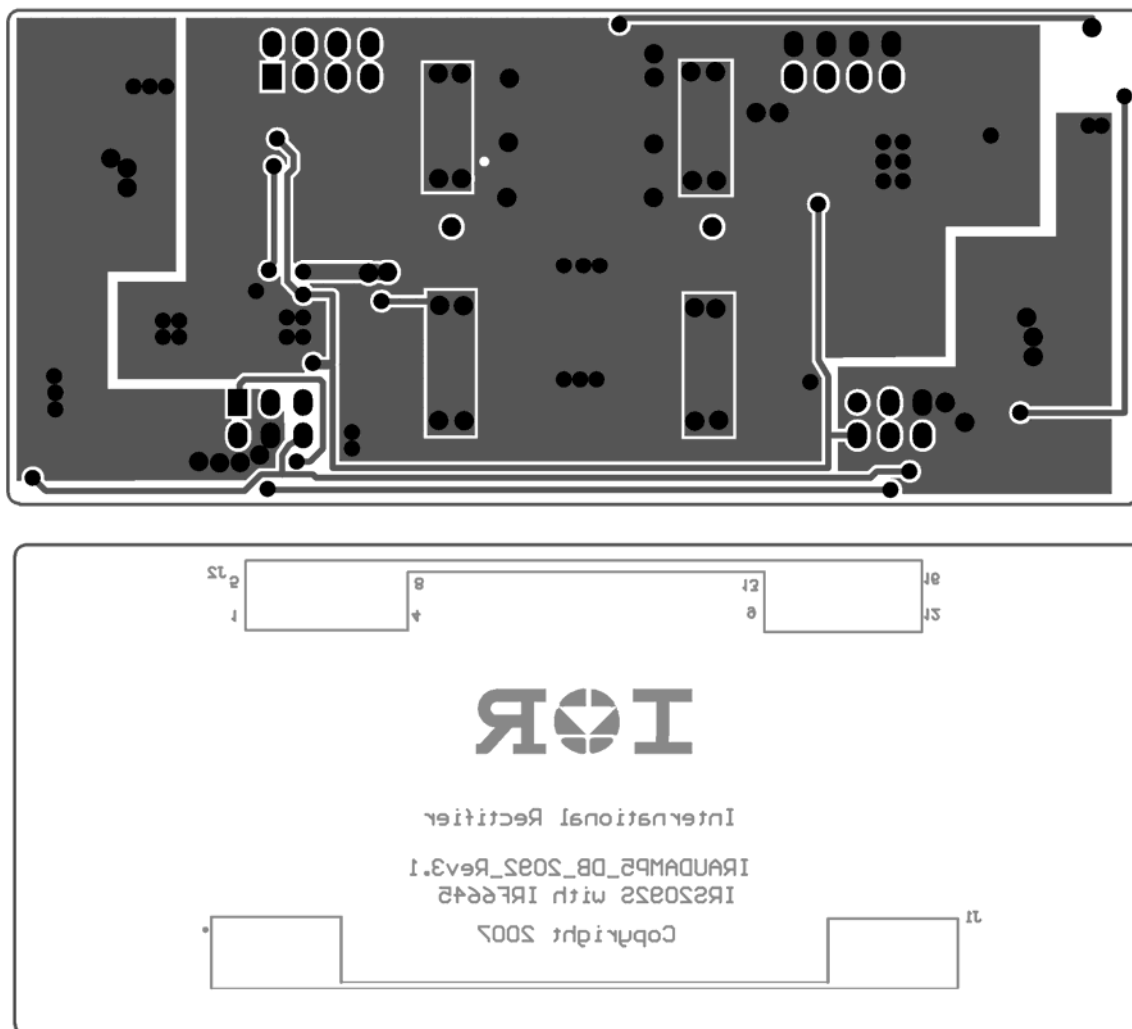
PCB Layout – Bottom Layer and Pads and bottom silk screen
